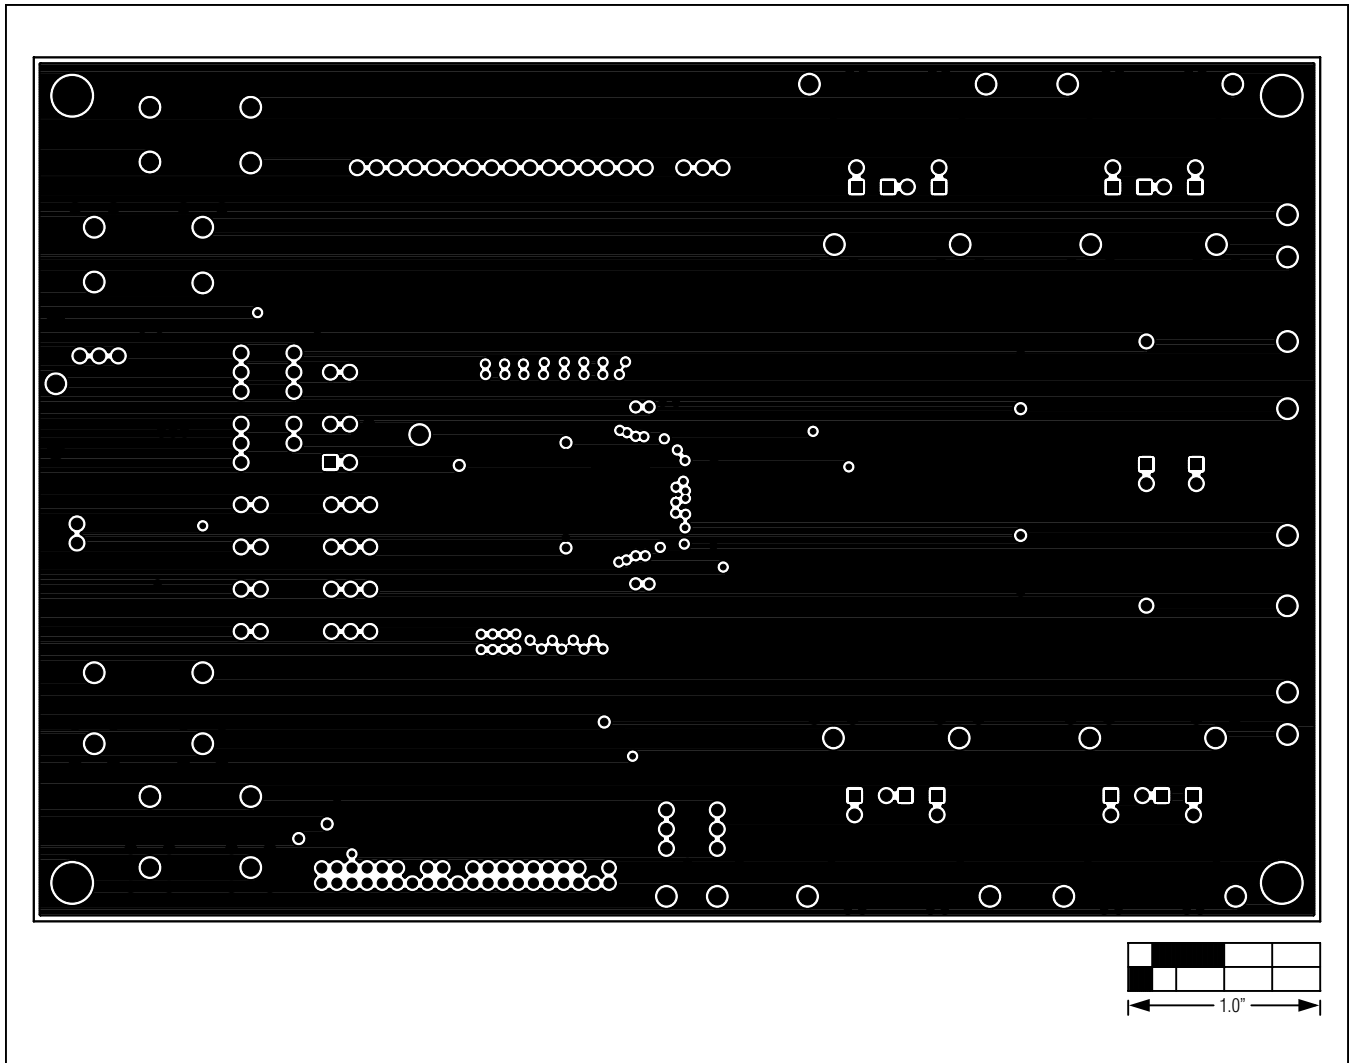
MAX14808 EV Kit PCB Layout—Layer 2 (GND)
